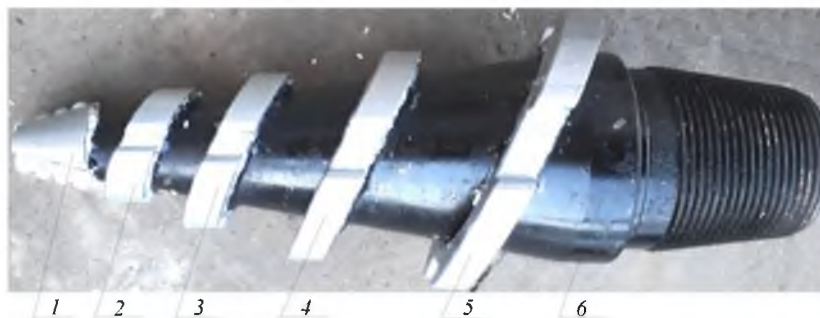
Drilling tools with cutting teeth made of high-speed steel grade P6M5
